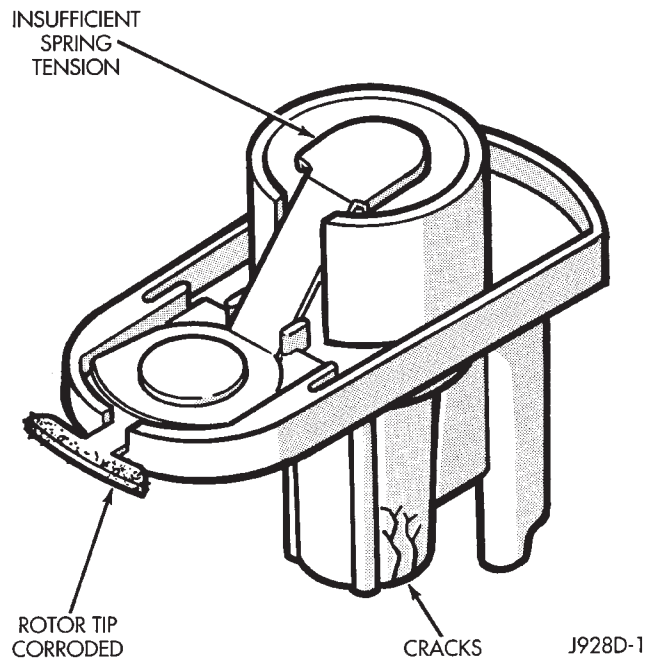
Rotor Inspection—4.0L Engine—Typical
